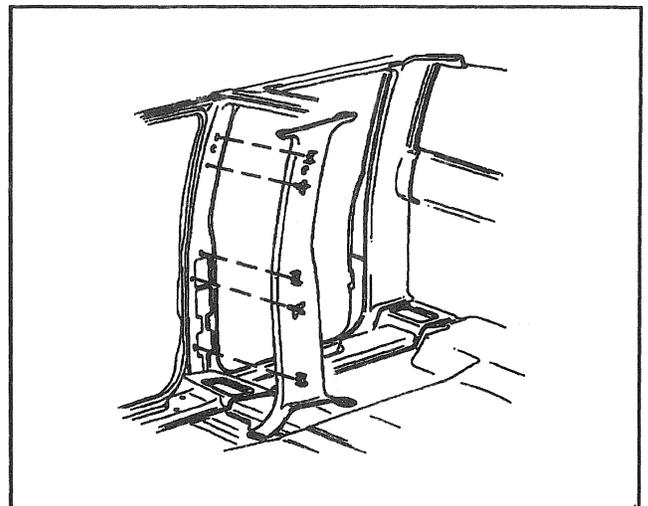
Front Side Door Lock Pillar Garnish Molding (Crew Cab)
